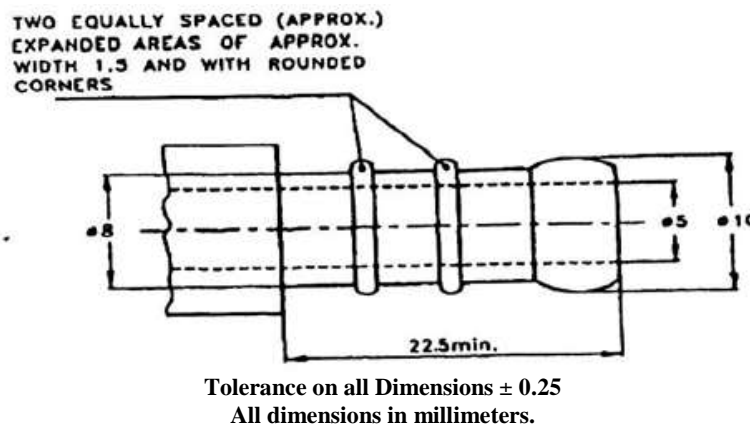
NOZZLE FOR 6.4 MM BORE TUBING
